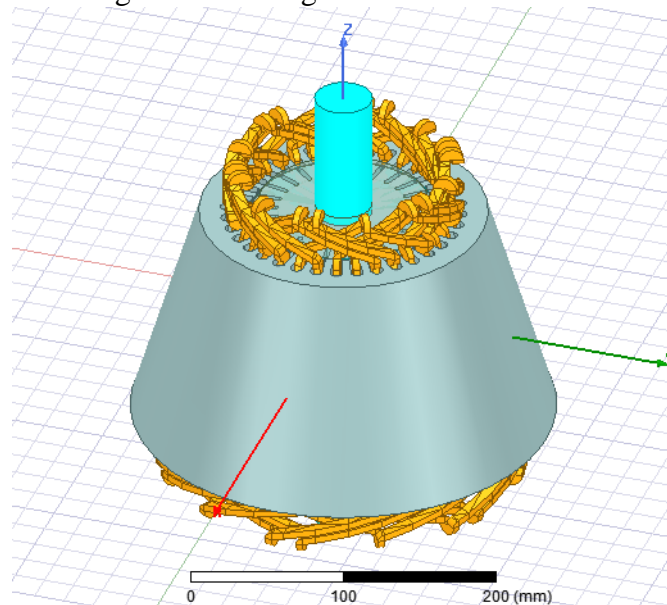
3D Conical Motor View through 190 mm Diameter to 280 mm Diameter
